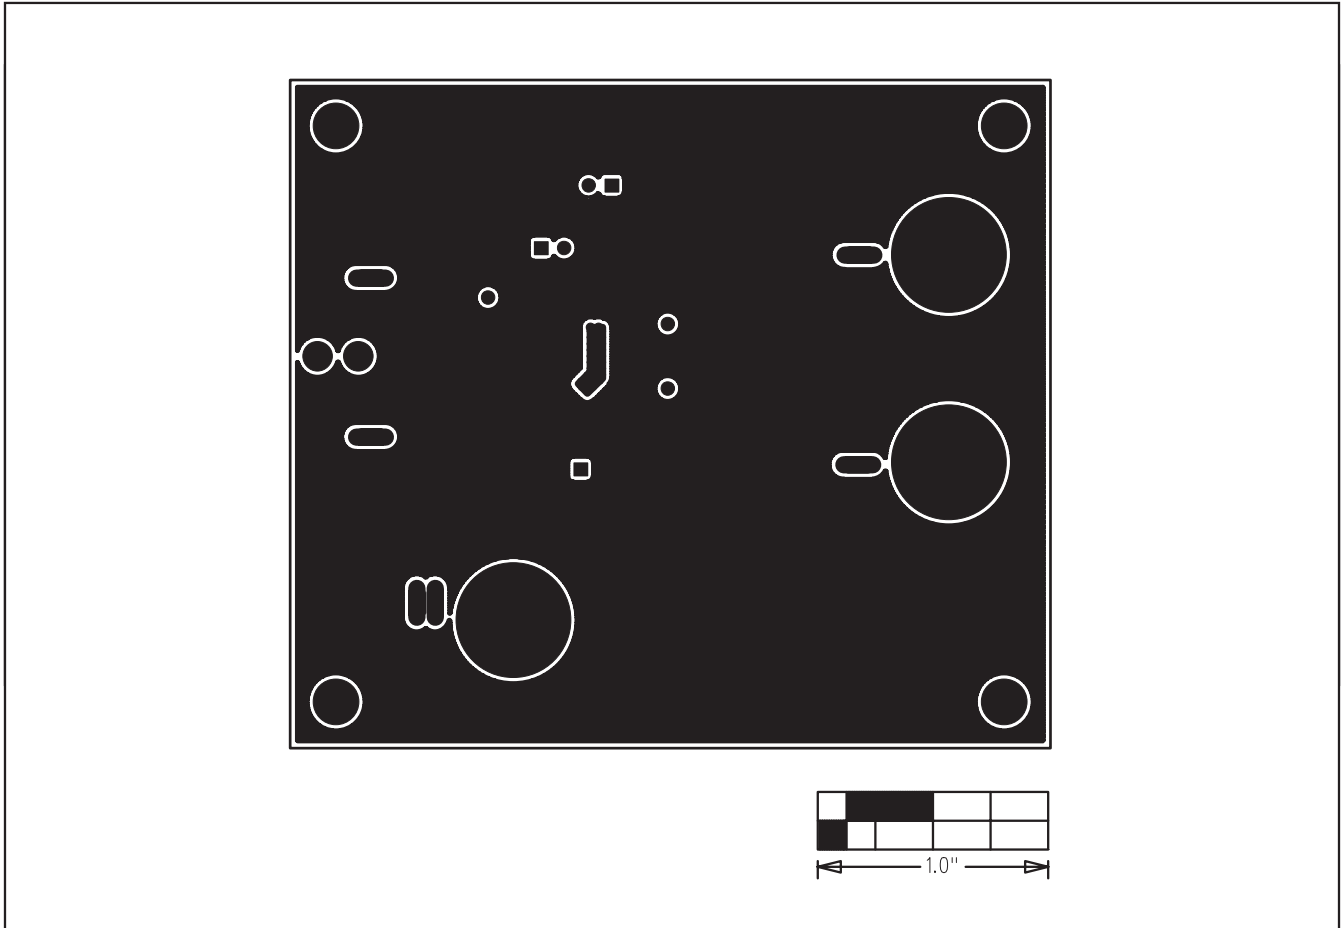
MAX9737 EV Kit PCB Layout—Solder Side
